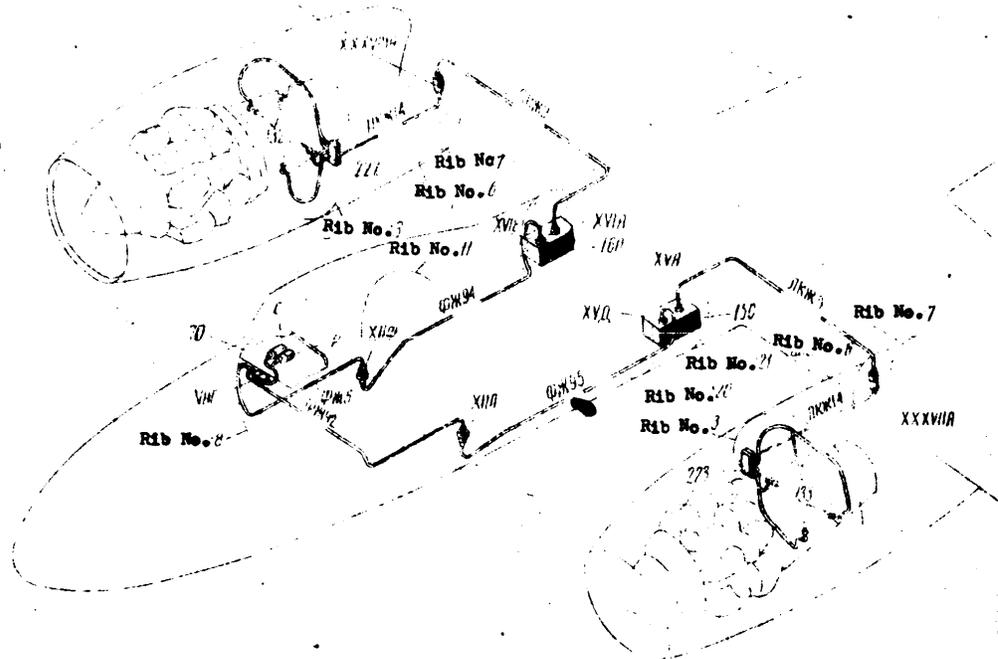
Assembly diagram of the exhaust gas thermometers.
